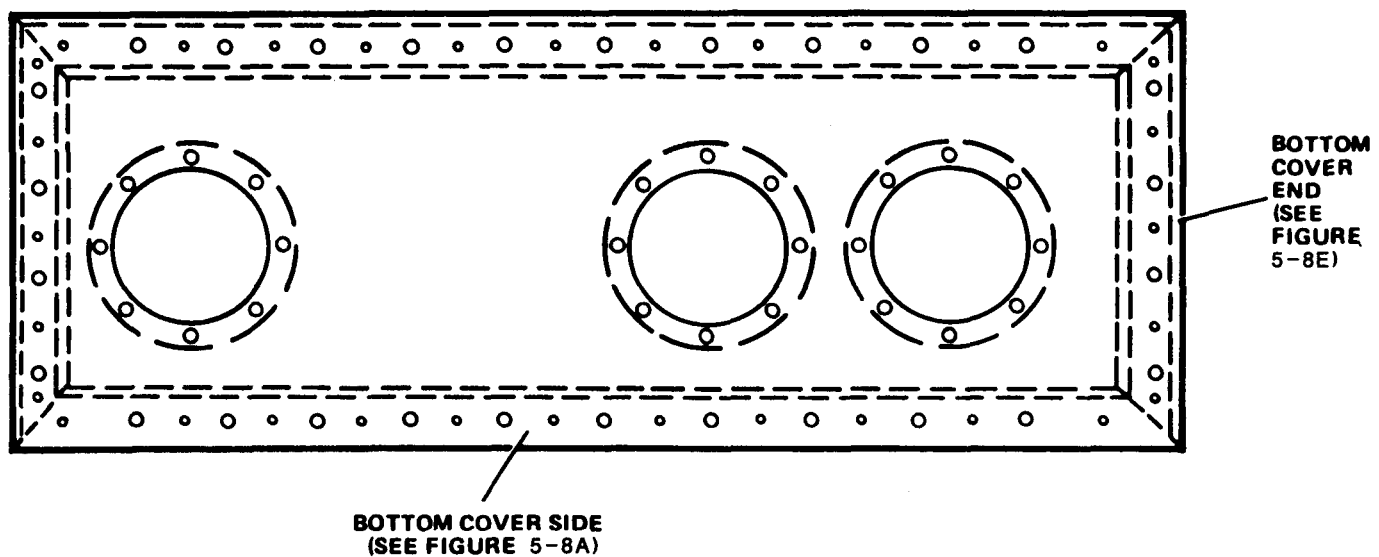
Gasket Dimensions (Sheet 2 of 3)
